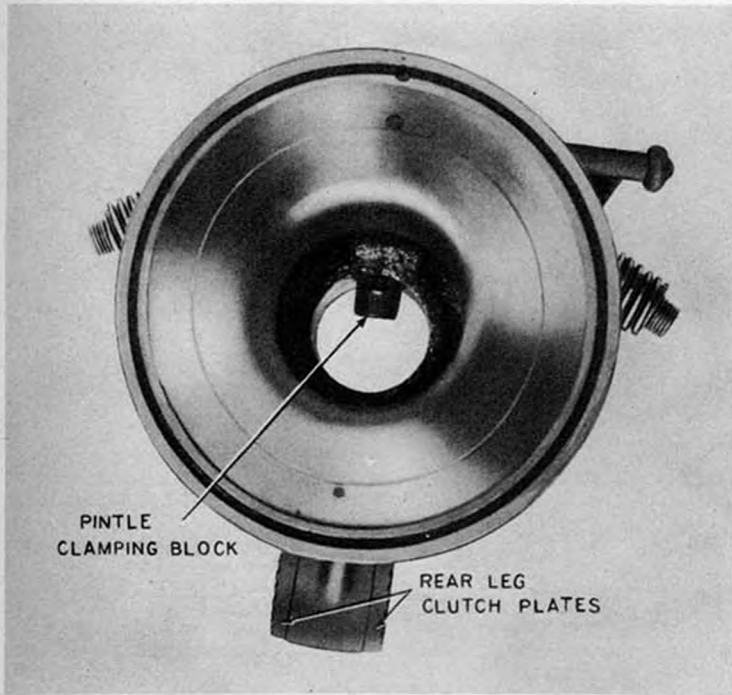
Inside of pintle socket assembly with cradle pintle clamping screw assembly and pintle clamping block screwed in.
